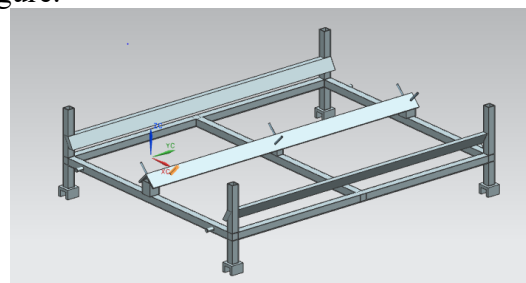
Bottom frame of the skid that holds the brackets.
